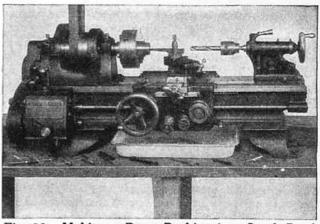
Making a Brass Bushing in a South Bend Bench Lathe
